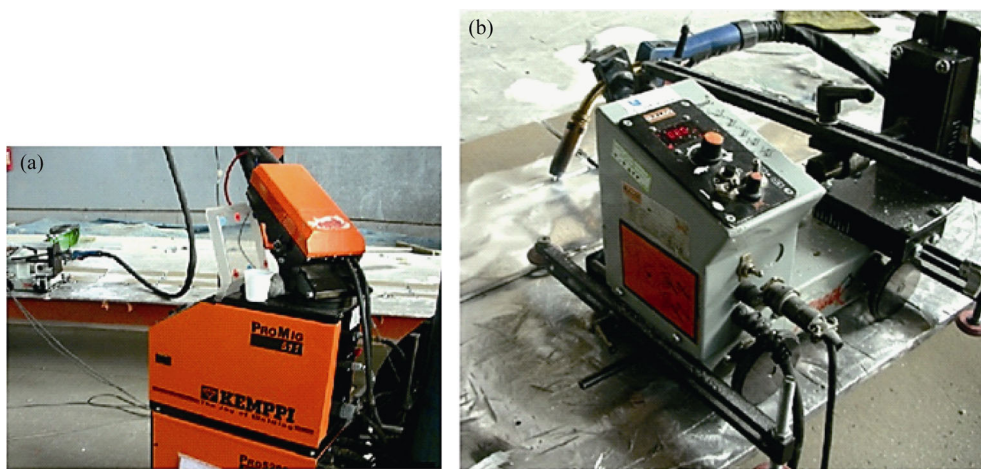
(a) Automatic DP-GMAW machine for welding; (b) close-up view of the specimens.
